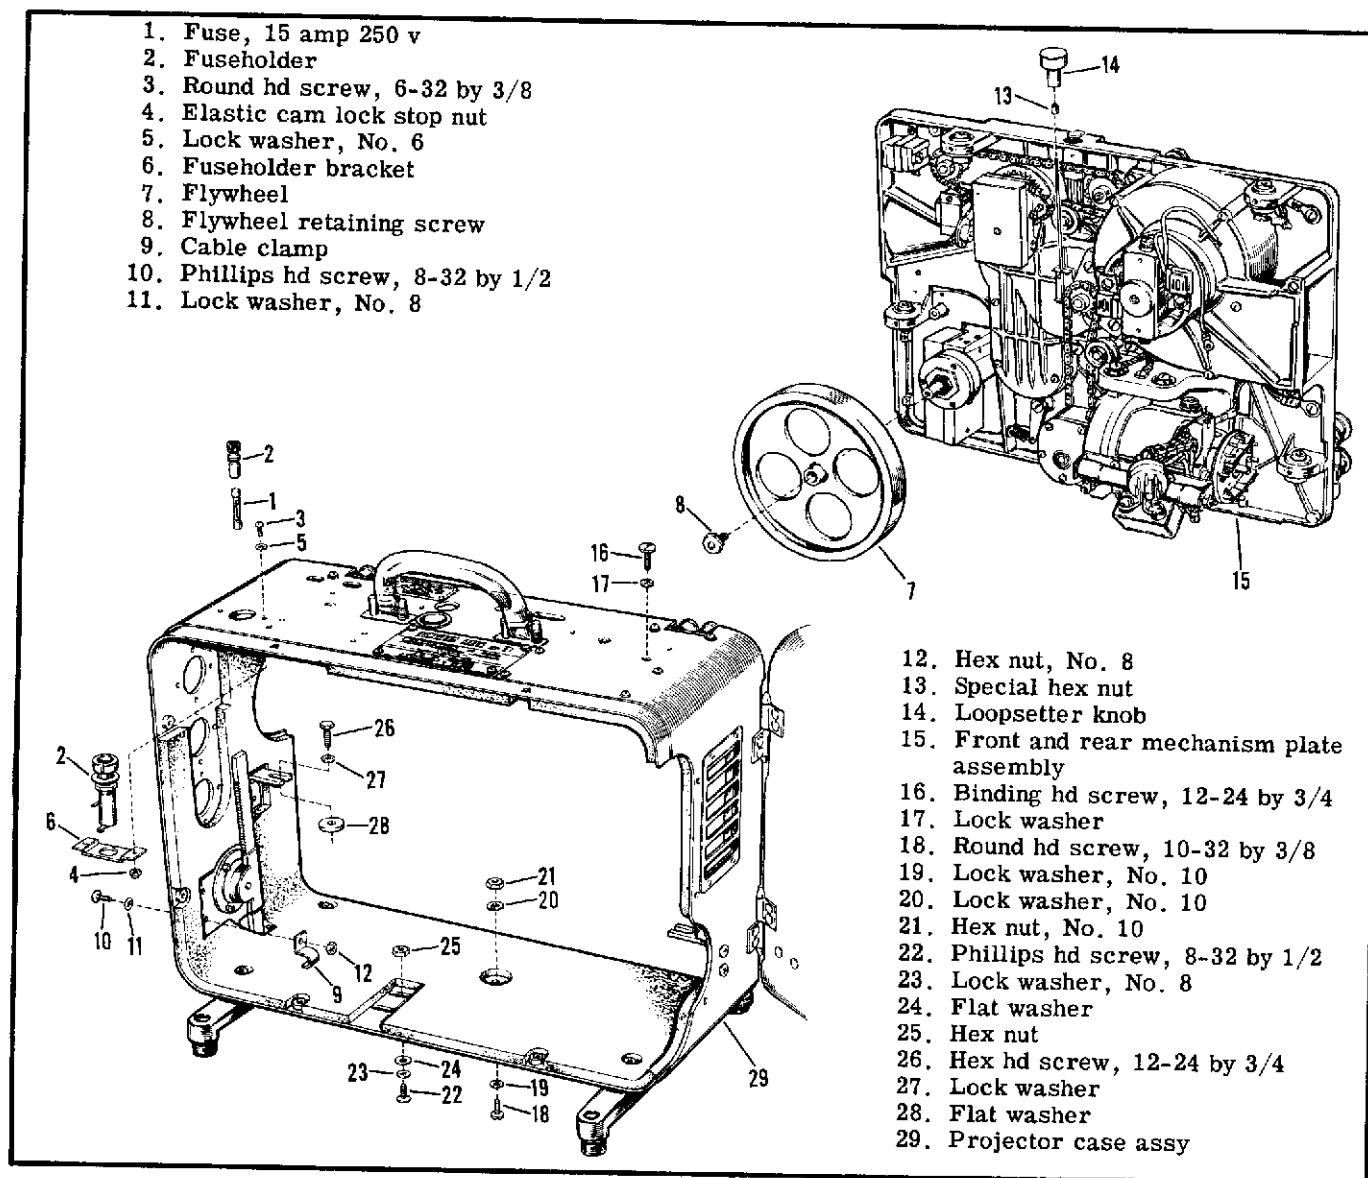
Removing Mechanism Plate Assembly from Case.
